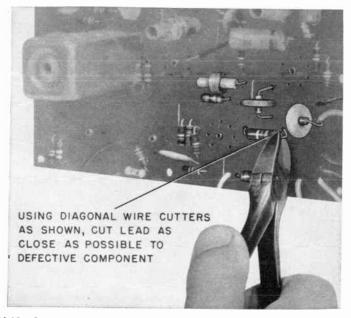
Cutting a defective resistor free of the printed-circuit board. (Admiral Corp.)
